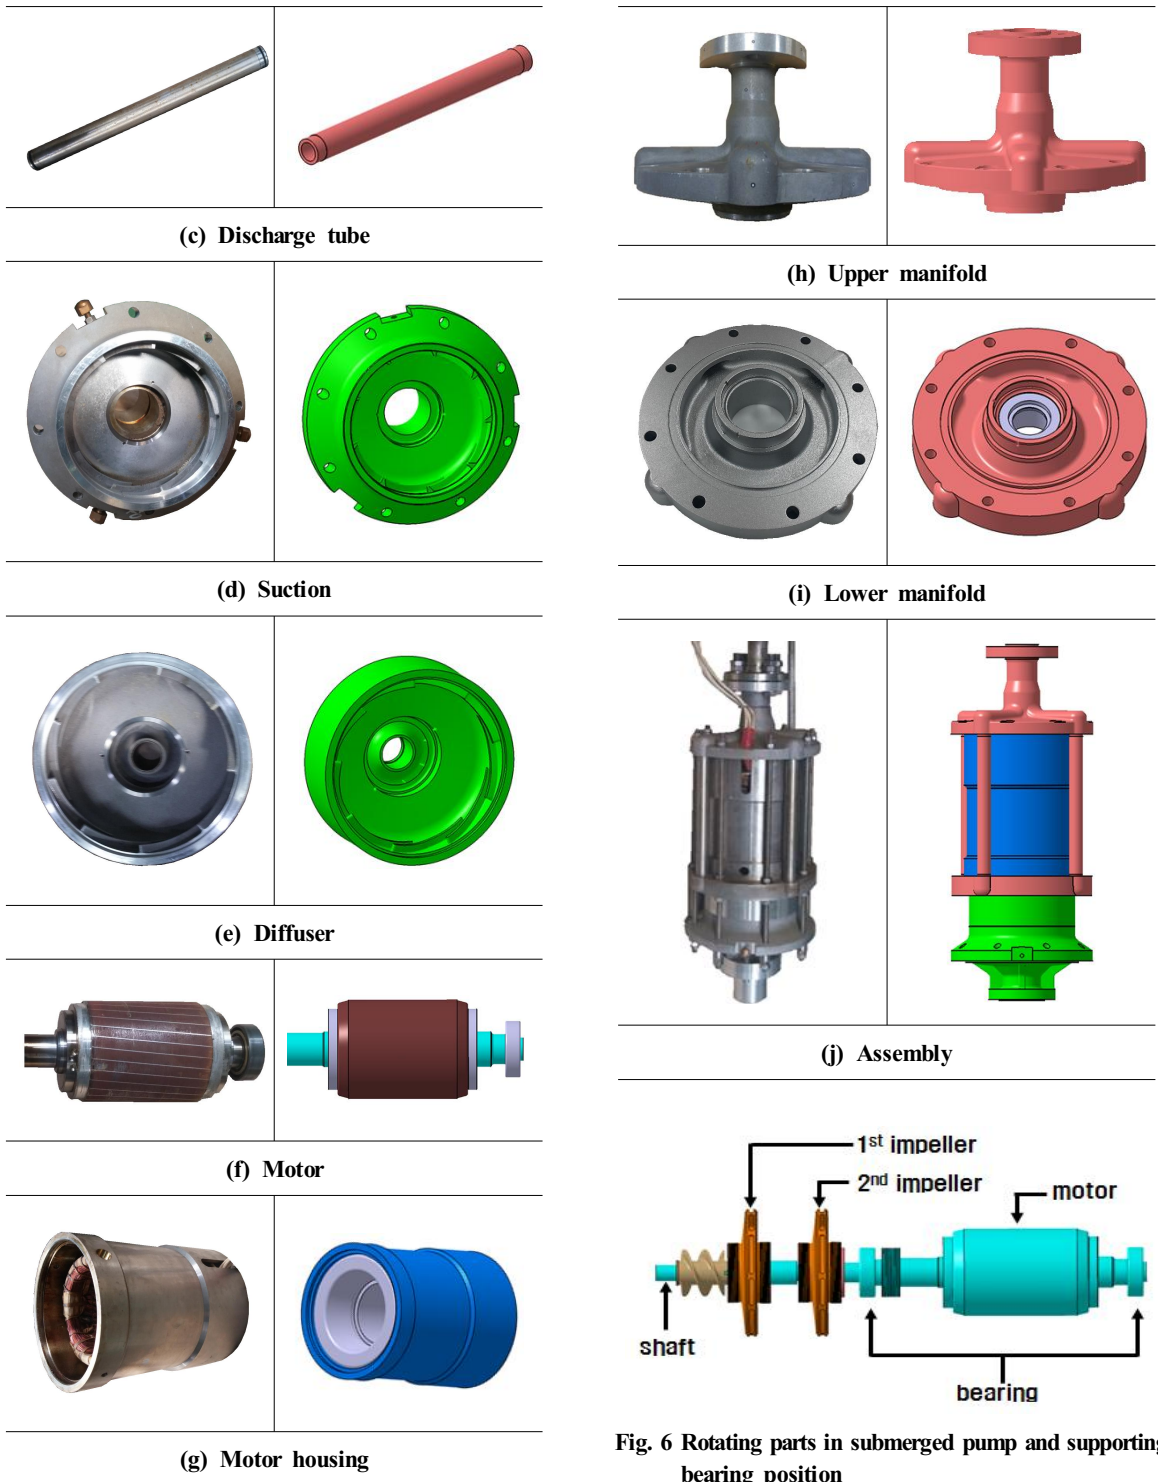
Rotating parts in submerged pump and supporting bearing position
